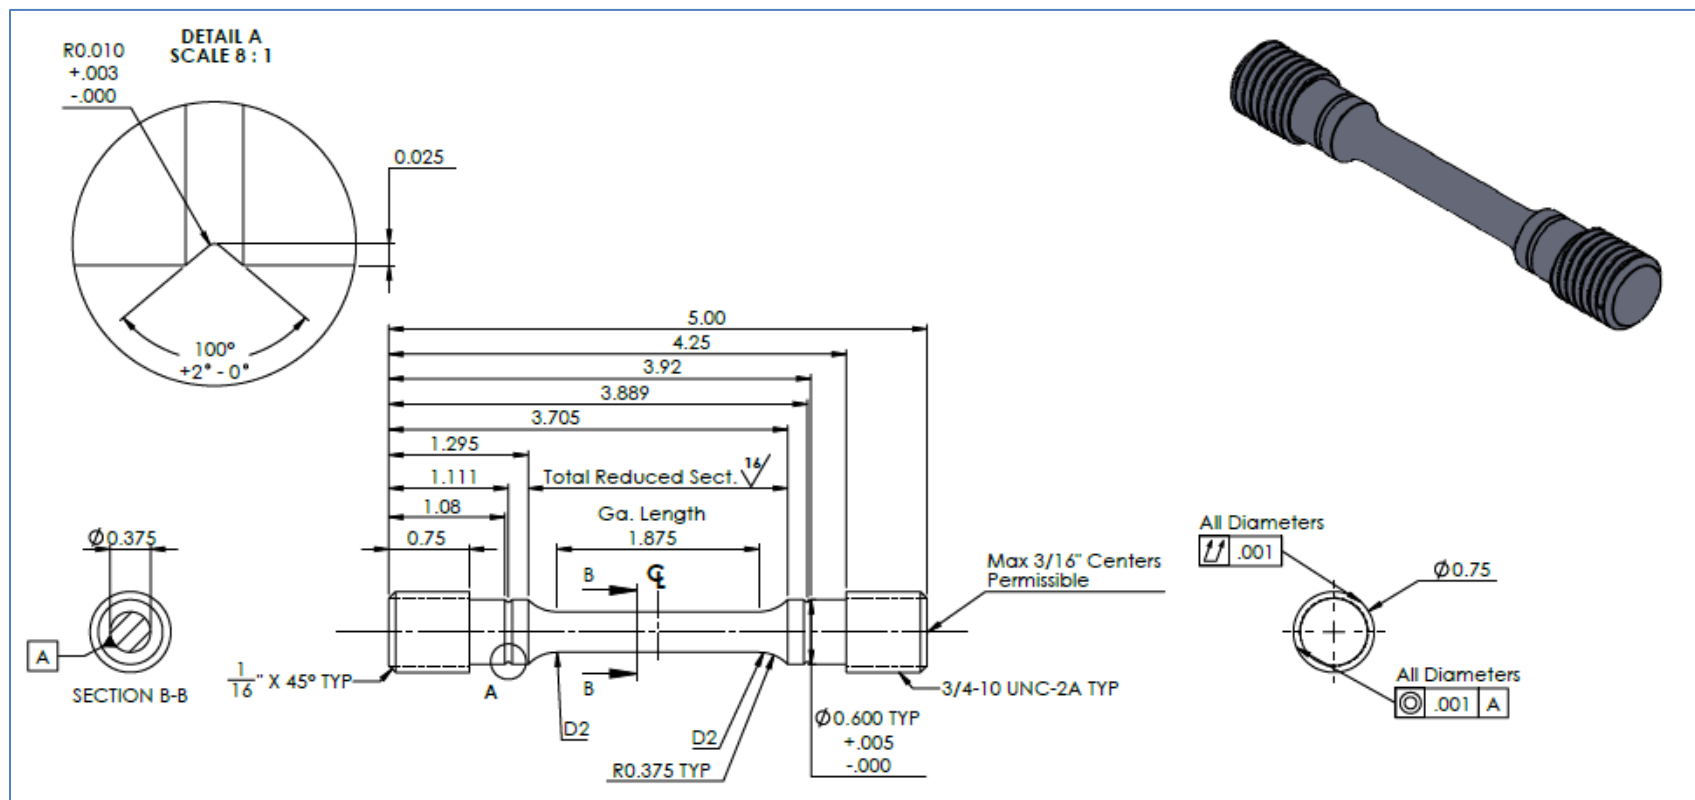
Drawing used in machining Alloy 709 specimen (dimensions are in inches).
